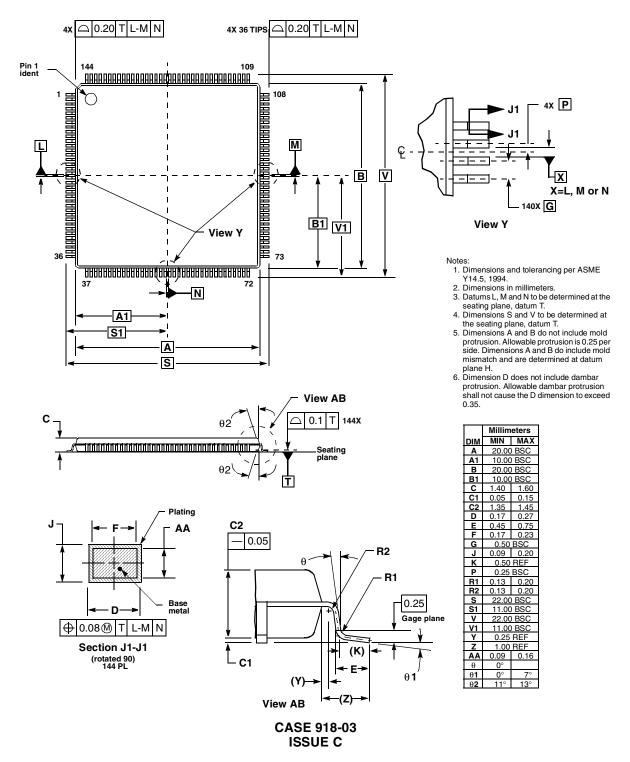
DSP56309 Mechanical Information, 144-pin TQFP Package
